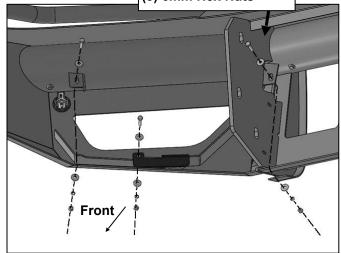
Models without tow hooks, attach Driver/Left Support Bracket to the top of the Frame Bracket. Models with tow hooks, attach tow hook to inside top of Mounting Bracket
